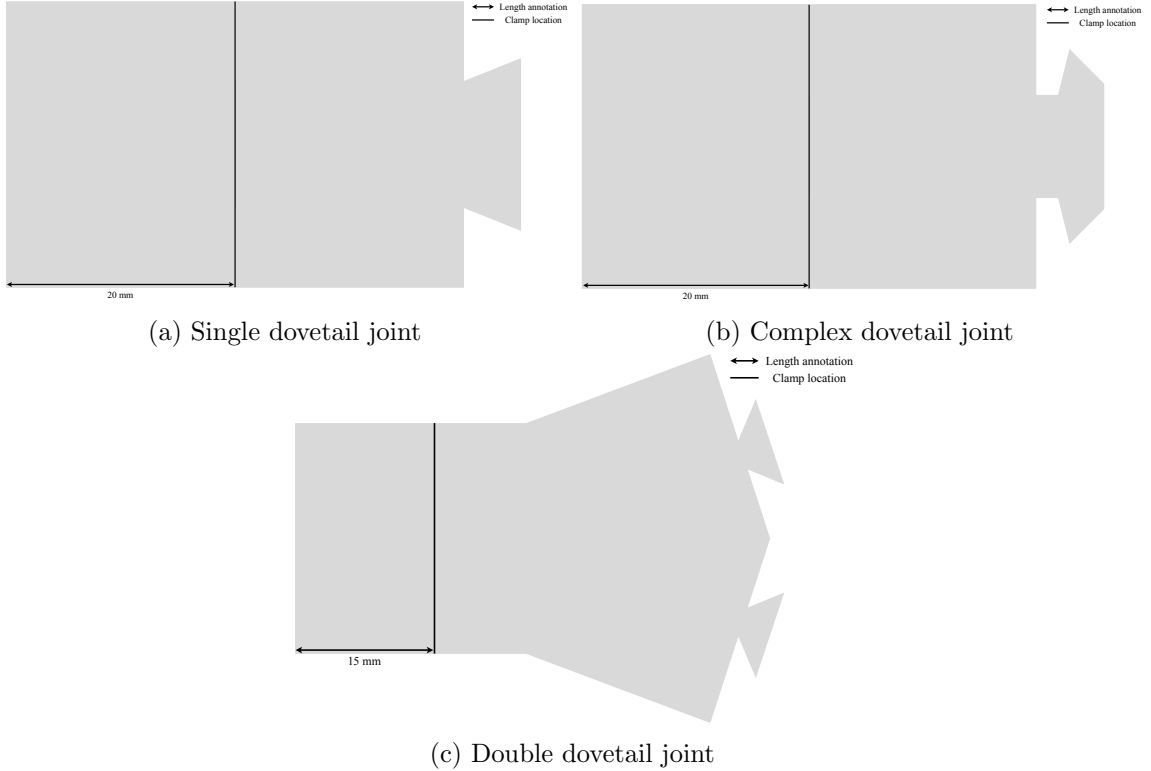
Tabs are added in real printings such that the universal testing machine can clamp the printed parts.
